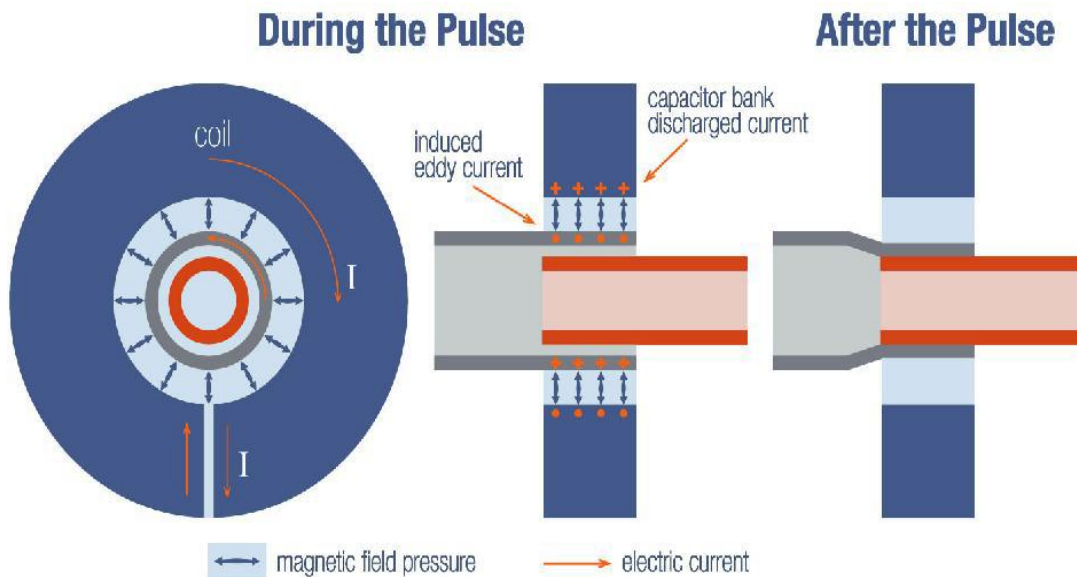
Schematic diagram of Electromagnetic welding operation [25]
